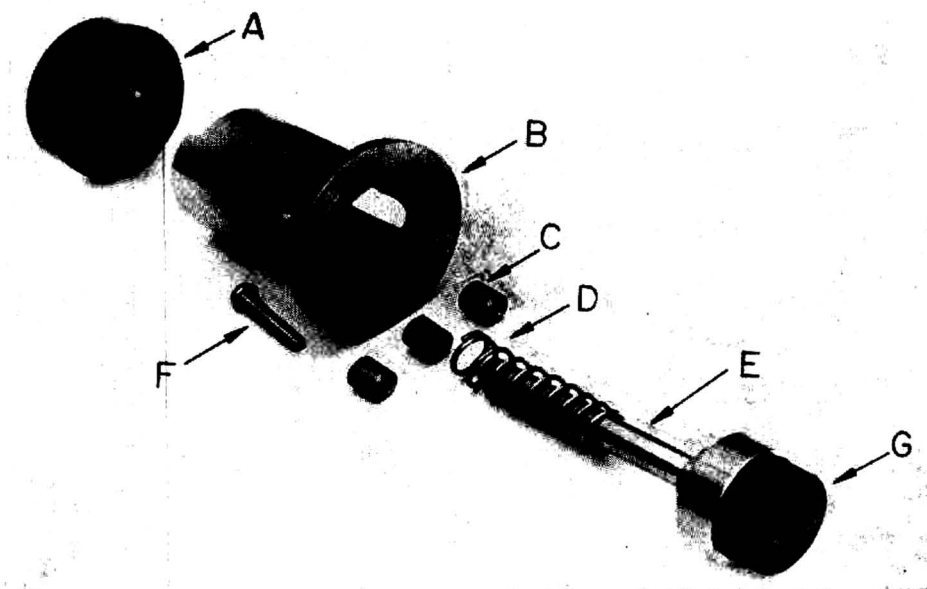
Exploded view of high-temperature valve assembly. A = valve handle, B = valve guide, C = stand-offs for valve guide (not shown in Fig. 3), D = valve spring, E = valve stem, F = valve graphite disc. The slot in the disc carries gas from column to detector. The round hole near the periphery carries to the hollow stem of guide, E, whence it exhausts to the atmosphere (see exhaust port, Fig. 5).
